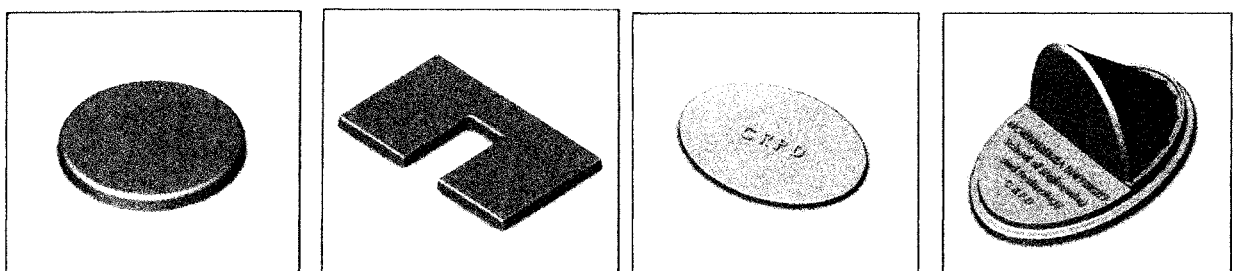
3D design of cylinder, U shape and ellipse test pieces and Millennium Bridge.
